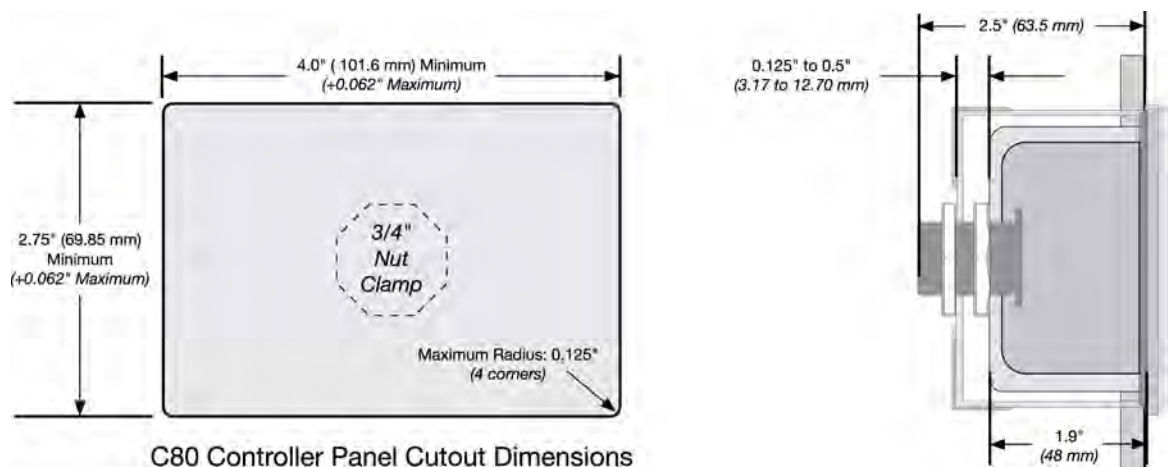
C80 Controller Panel Cutout Dimensions
